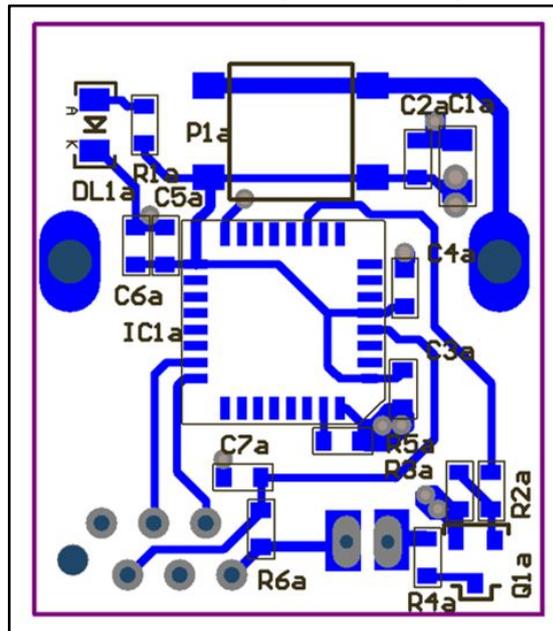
IR TX remote control board layout: bottom layer + mirrored top overlay
